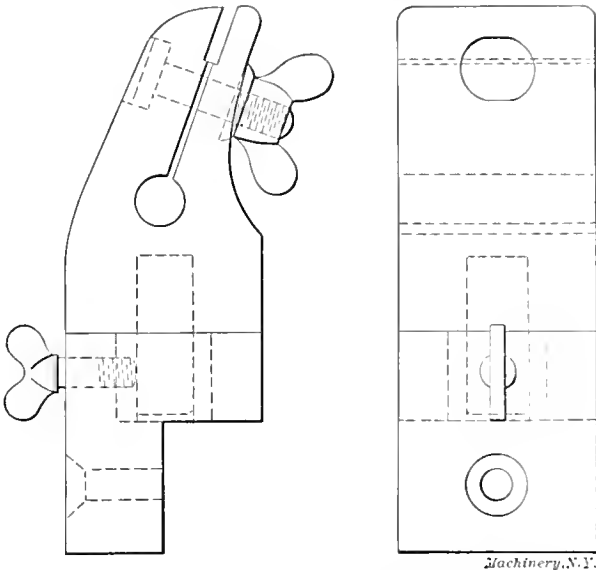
Vise for Holding Templates and Master Tools when Filing.
